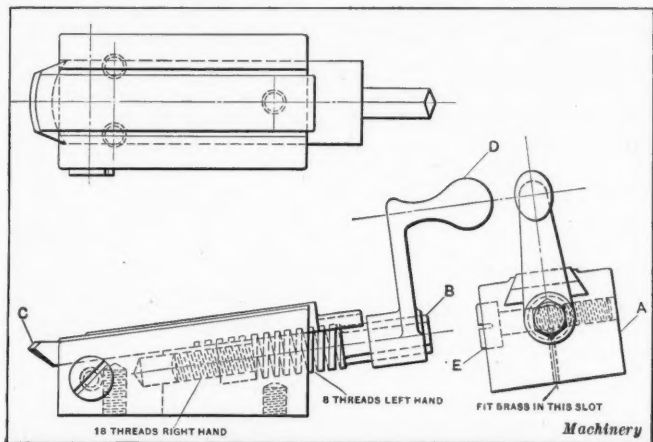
Clamping Device used in Fixtures shown in Figs. 10 and 11
